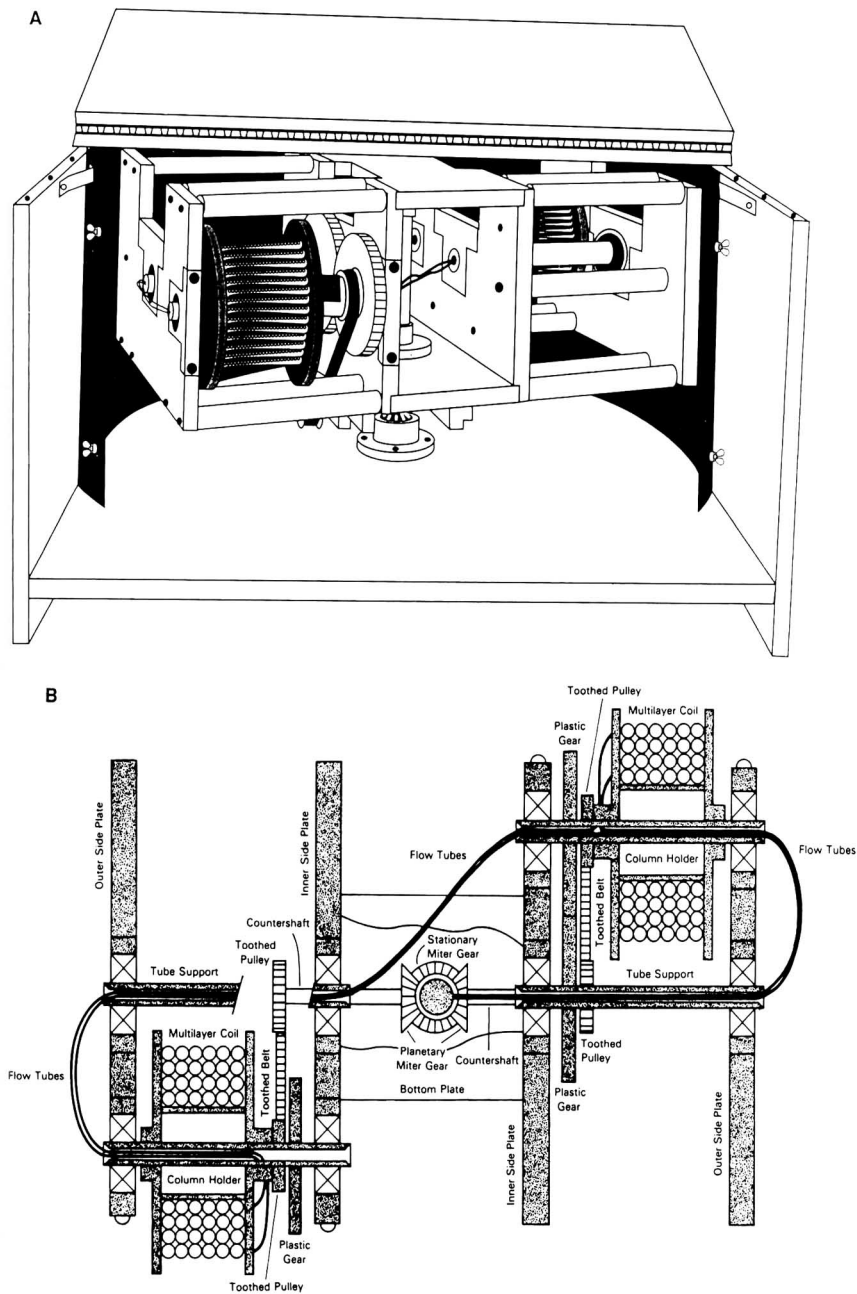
Design of the apparatus. (A) Front view; (B) horizontal cross-sectional view through the axis of the column holder.
